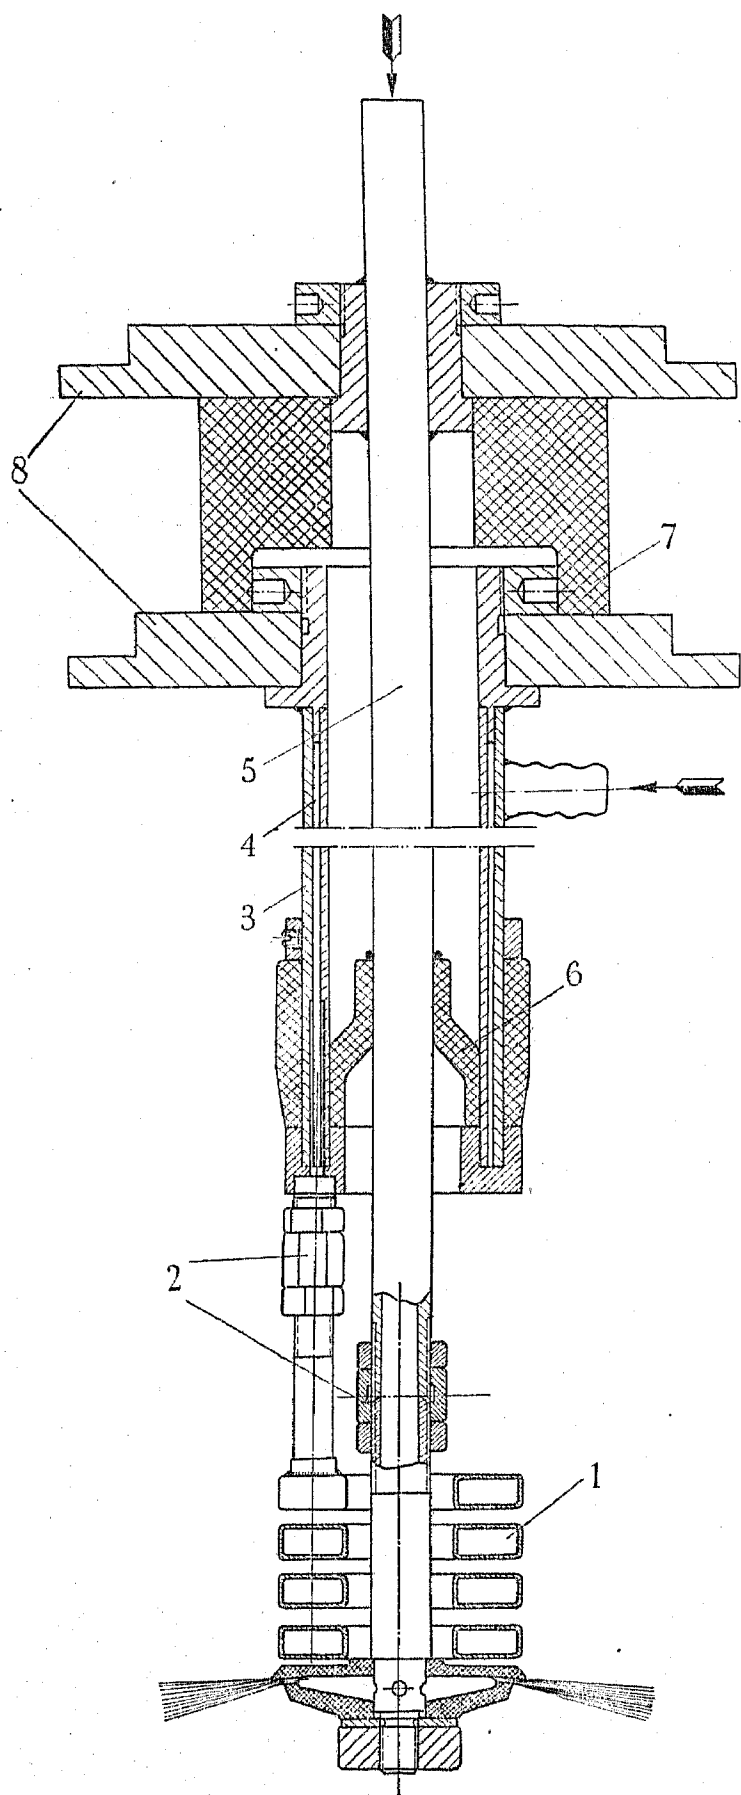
Section of a heating coil for hardening inner surfaces.
